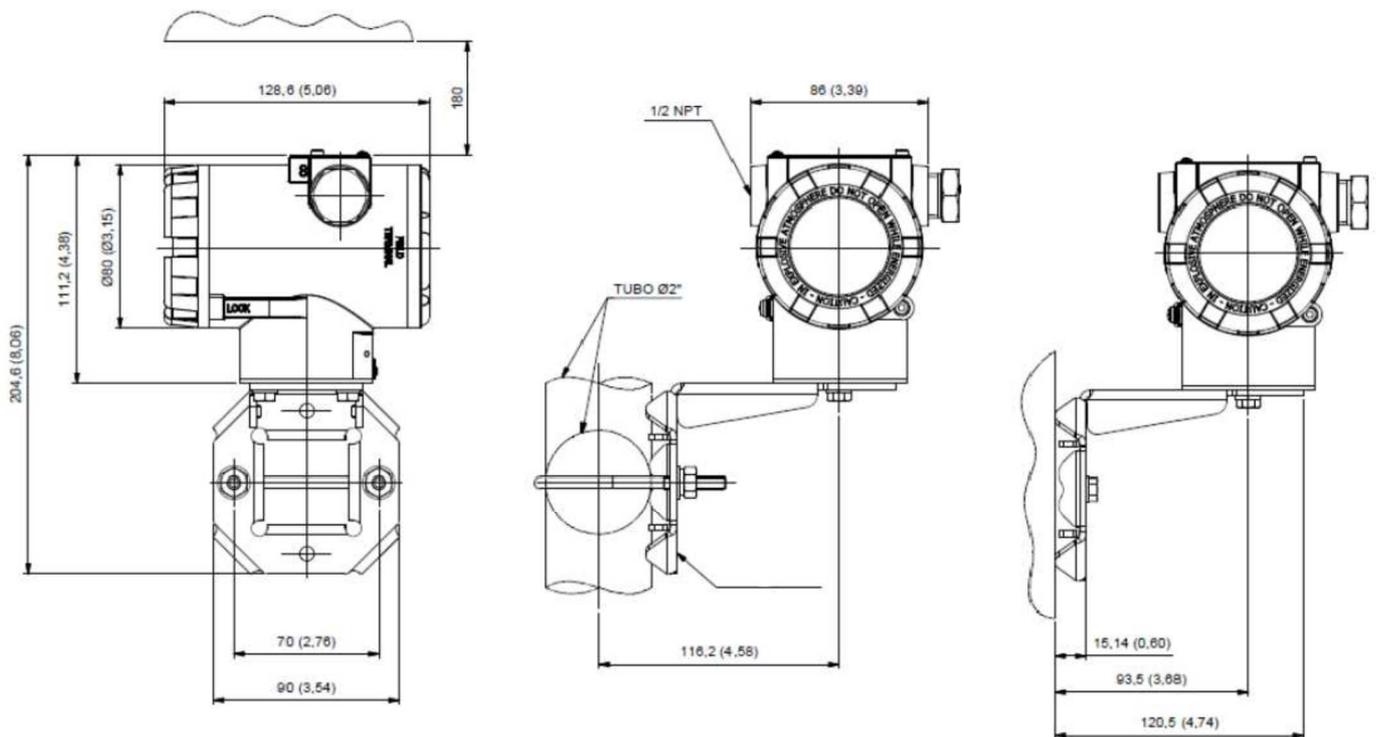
Dimensional and mounting drawings for VRI10-P.
